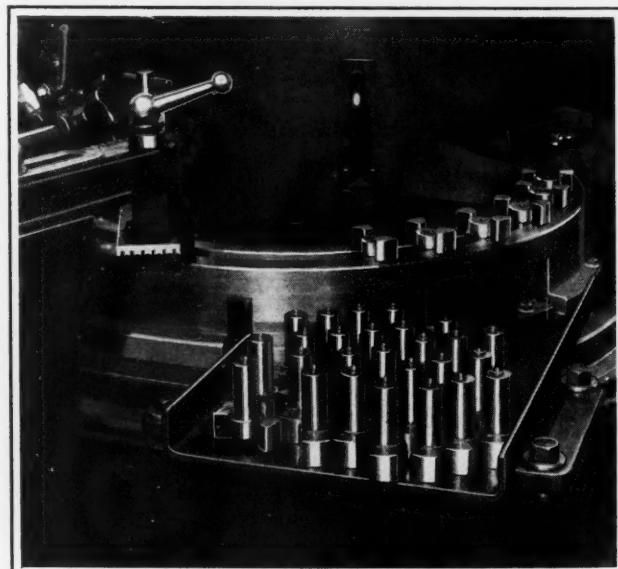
Two Concentric Steel Rings Form the Magnetic Poles for Holding the Work Shown
